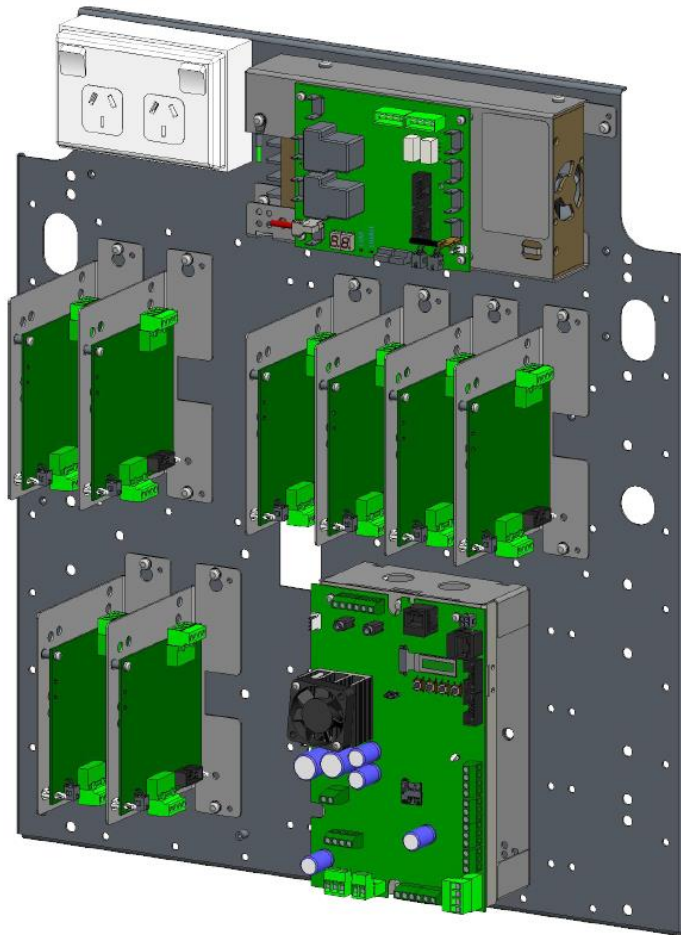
HLI Module Positions on 15U T-Gen2 Gear Plate
